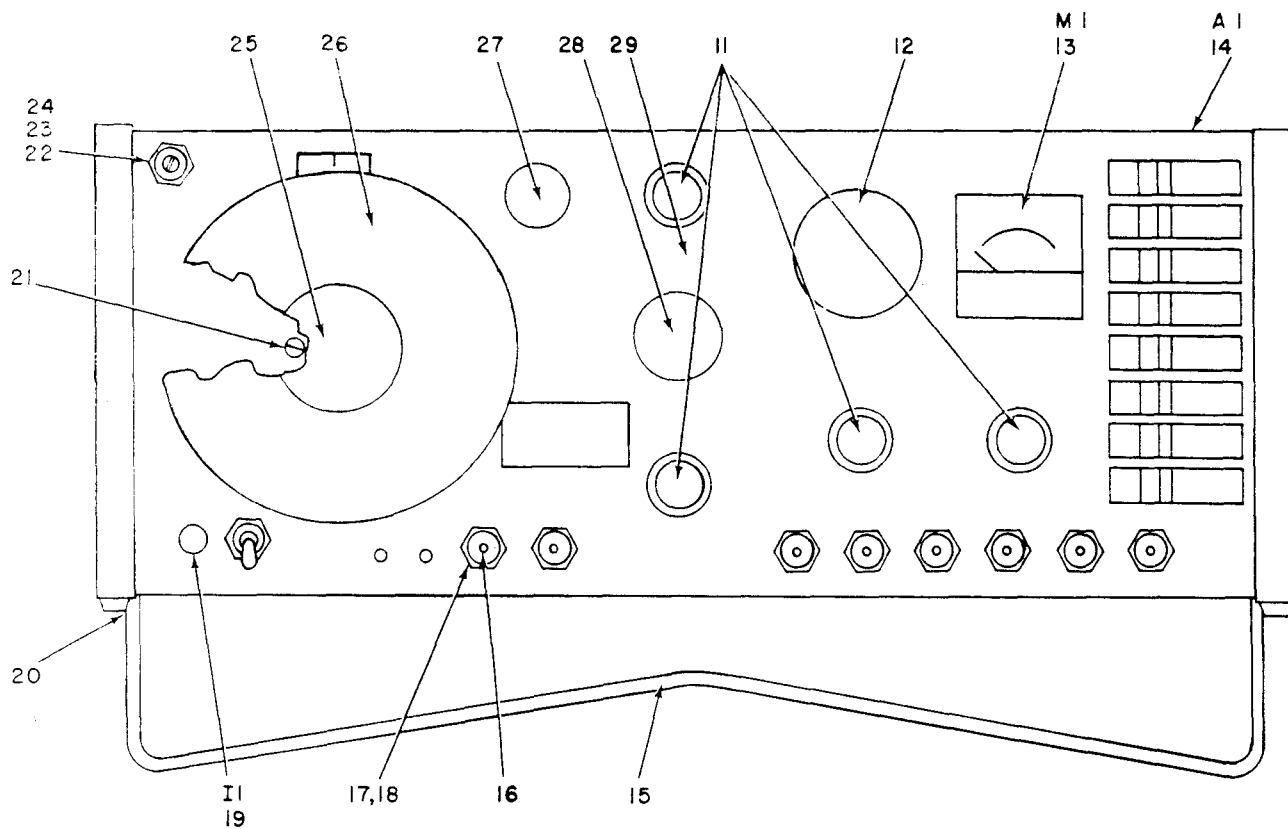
Chassis Assembly (A4) (Sheet 1 of 2).
